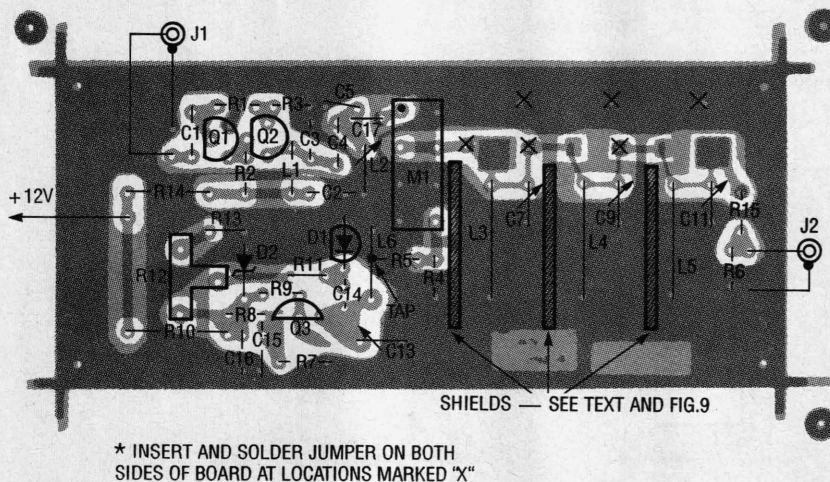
UPCONVERTER PARTS PLACEMENT. Be sure to solder leads on both sides of the board, and insert jumper wires through unused holes and solder them on both sides. Don't forget to install the shields between M1, L3, L4, and L5 (see Fig. 9).
